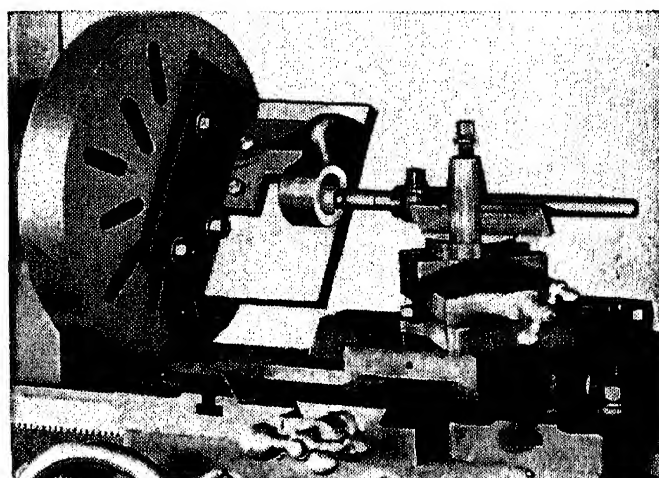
Boring a bracket mounted on an angle plate attached to a faceplate. (Courtesy South Bend Lathe Works.)
